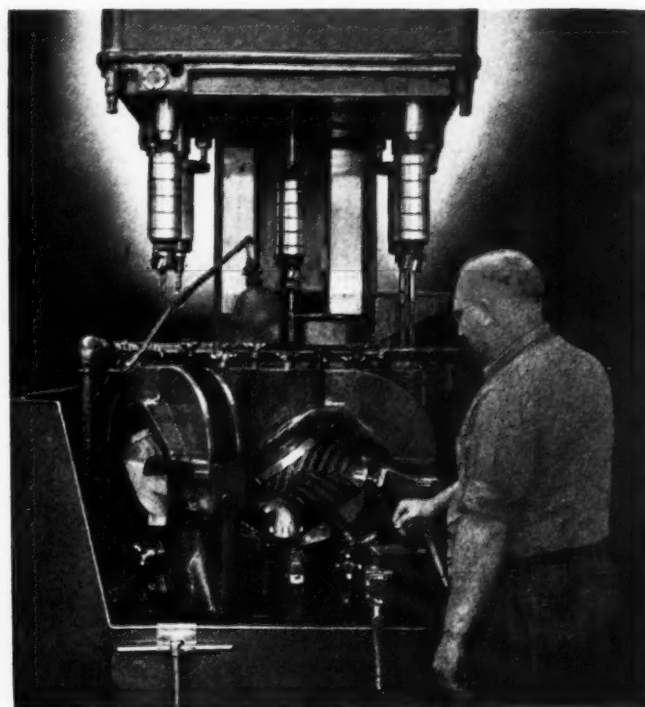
Six-station, Five-spindle Machine Used for Machining the Valve-guide Holes and Valve-seat Counterbores in Airplane Engine Cylinder Heads
